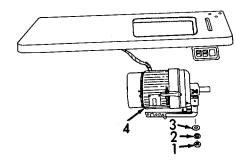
Electric Motor, Removal. GO TO NEXT PAGE
